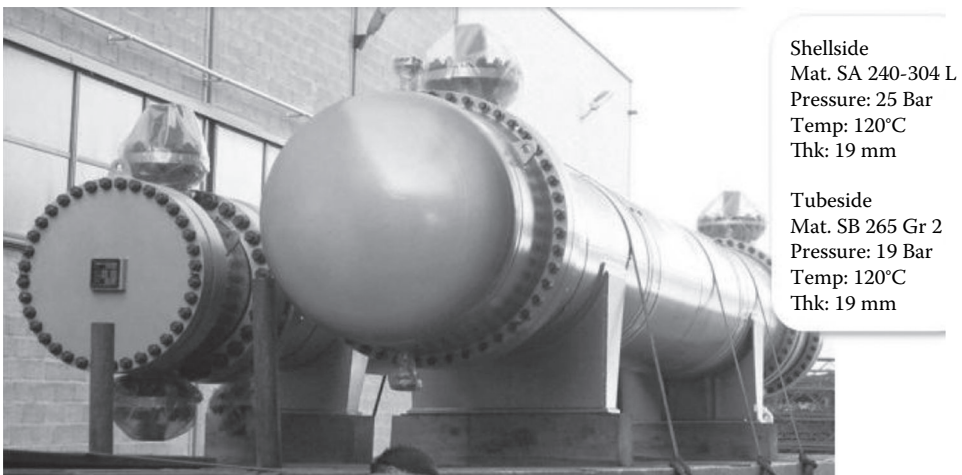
U-tube shell and tube heat exchangers showing bonnet and channel cover plate. (Courtesy of Brembana Costruzioni Industriali S.p.A., Milan, Italy.)
